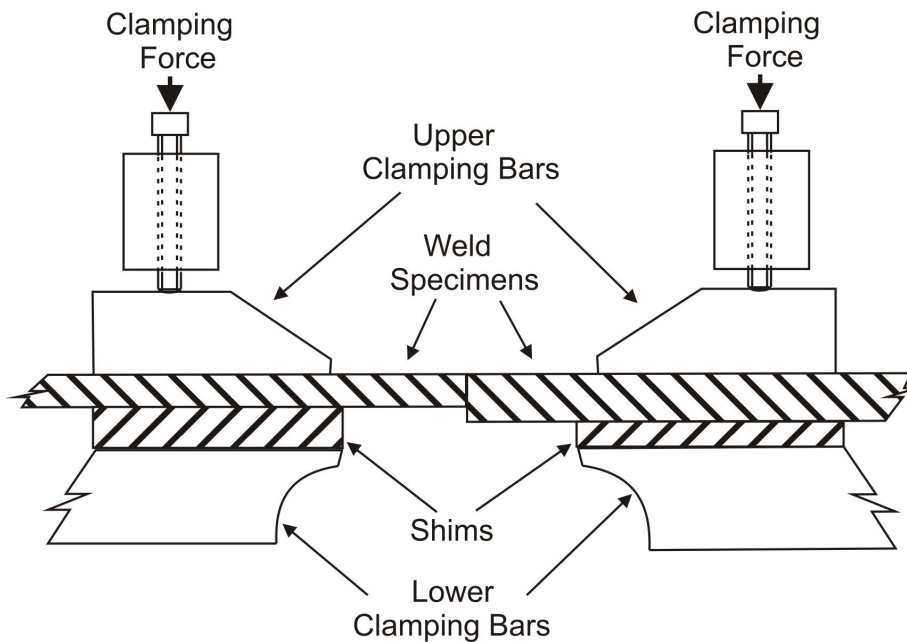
Schematic showing the shims used to align the top surfaces of the specimens prior to welding.
